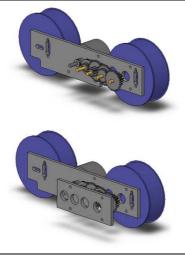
The assembly of gearbox, motor, and the wheels of one side of robot
